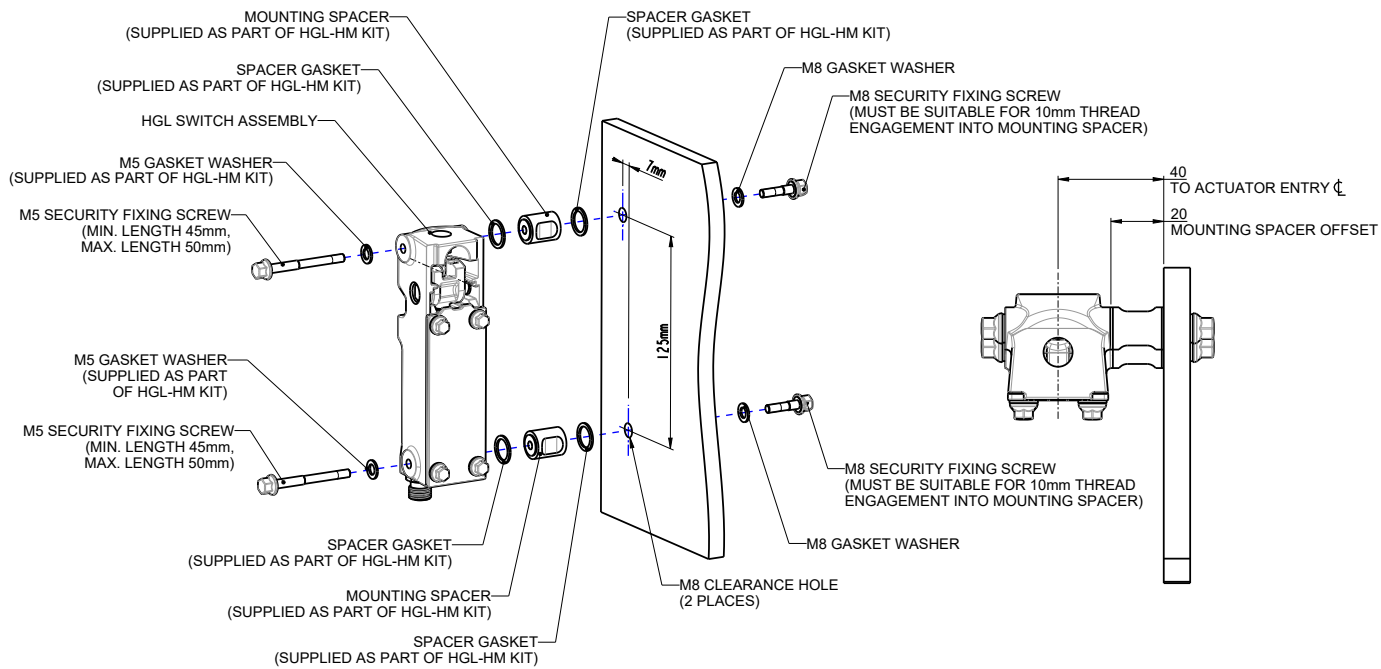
Switch Mounting using HGL-HM mounting kit Dimensional Drawing
